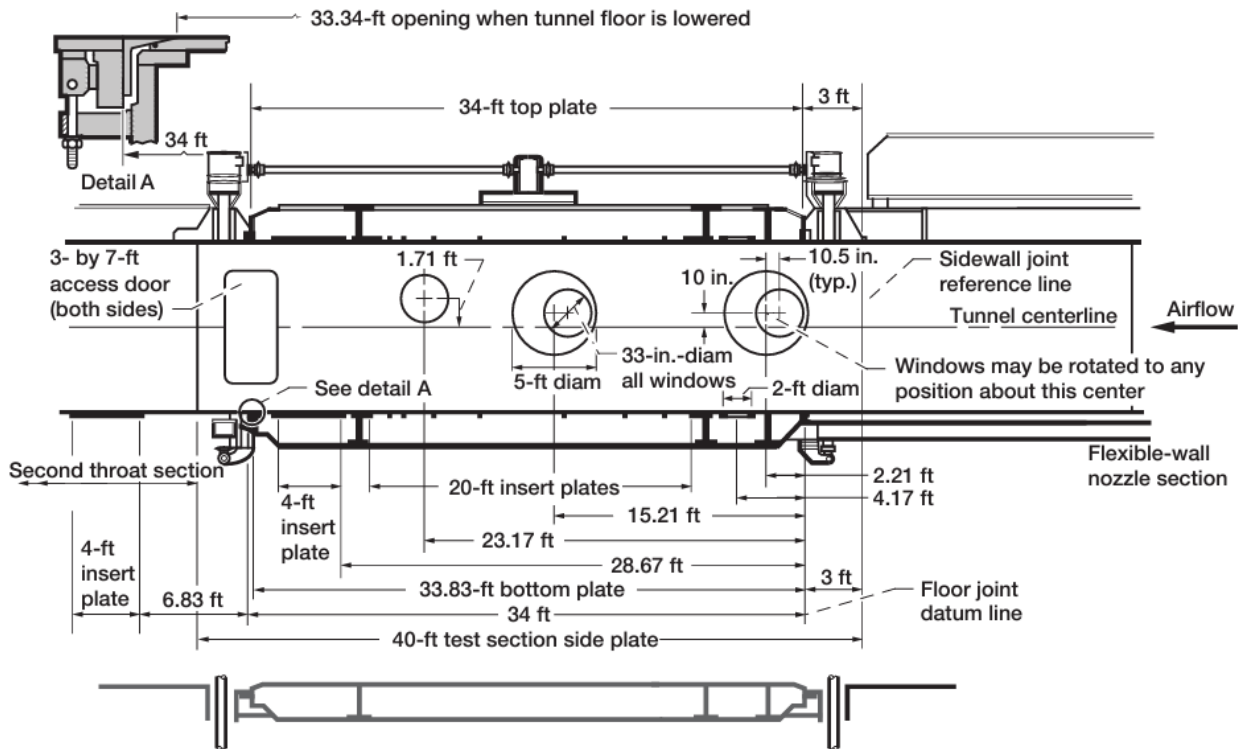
Elevation view of the 10- by 10-Foot Supersonic Wind Tunnel test section.
